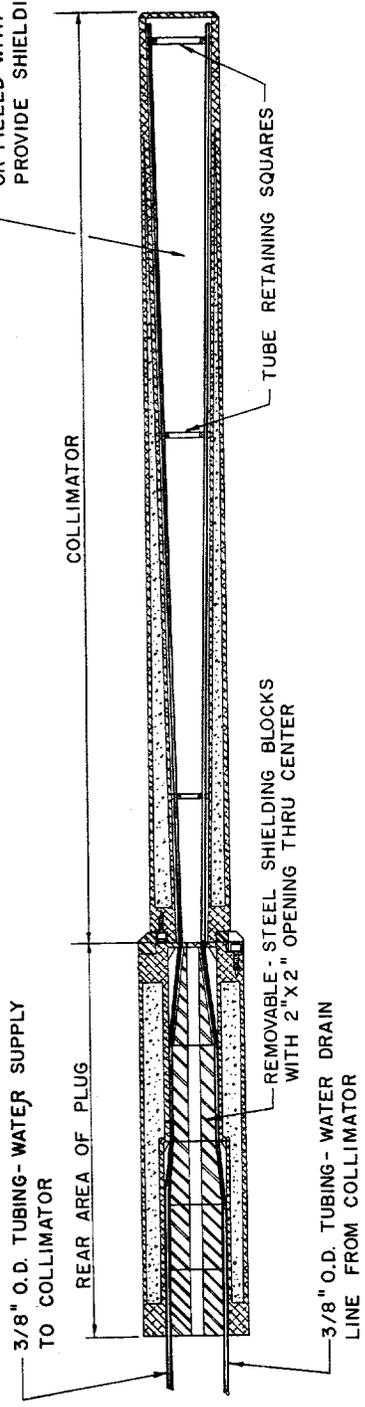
Typical Section Through Modified Beam Hole Plug.
